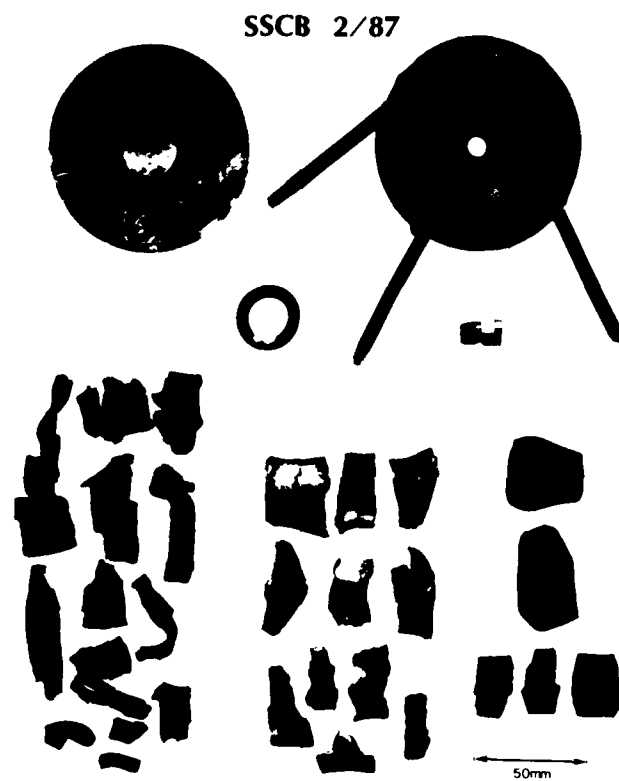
SSCB Baseplate Damage and Fragmentation, Mild Burning
